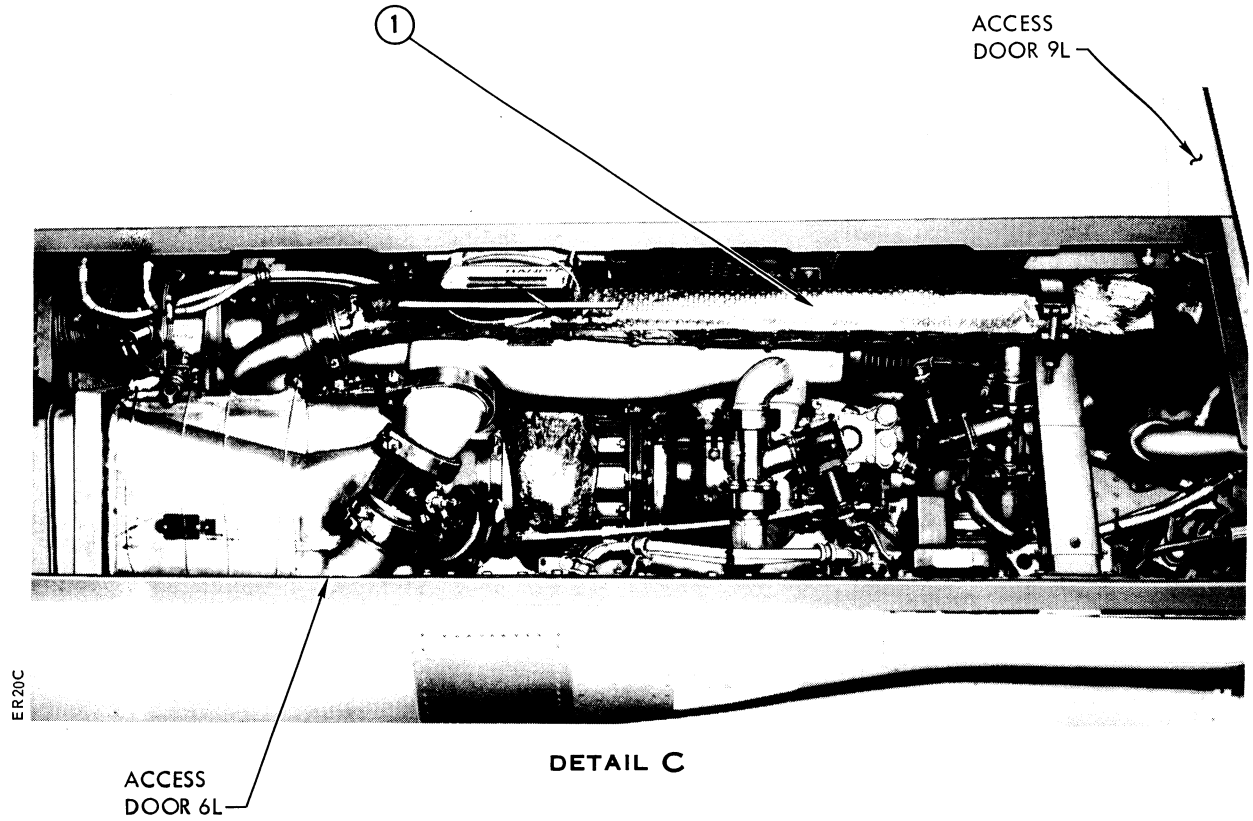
Forward Cockpit Throttle Quadrant Removal and Installation (Sheet 2 of 3)
